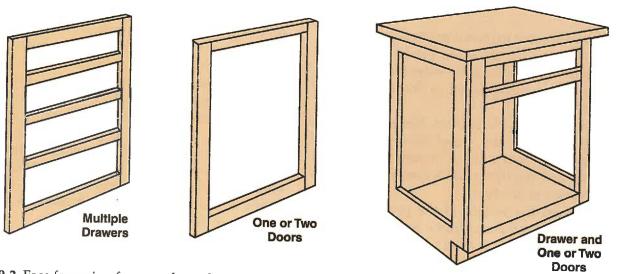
Face frame is a frame and panel assembly without the panel.
